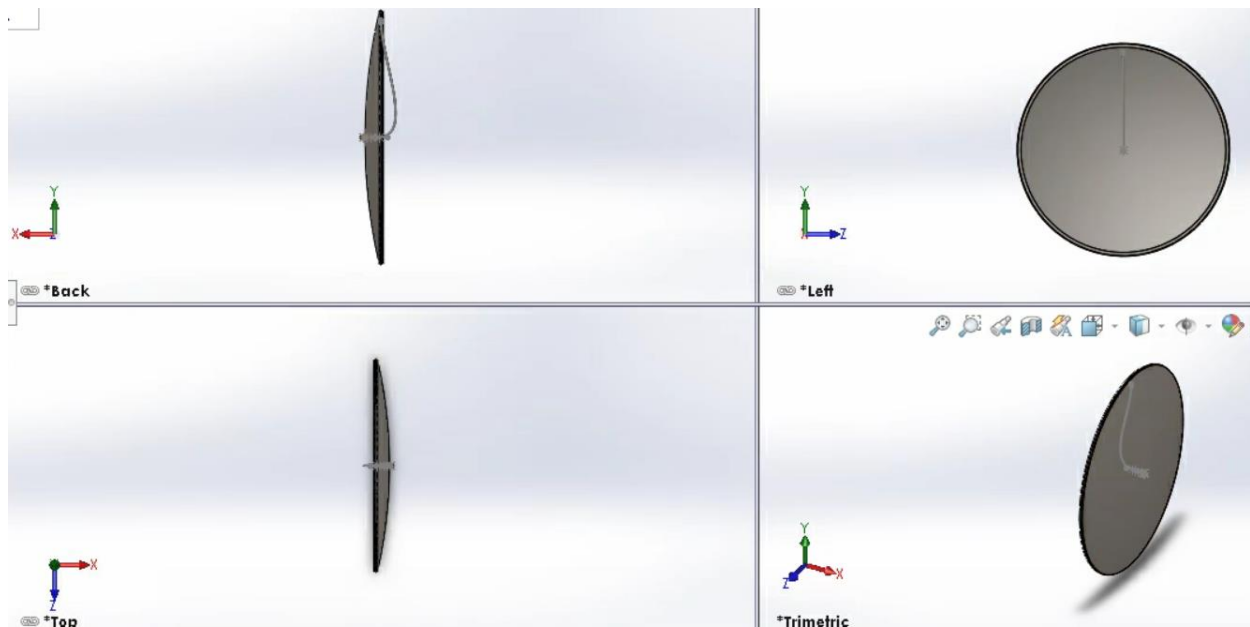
Isometric view of the water passage inflatable tube steel temporary bulkhead assembly
